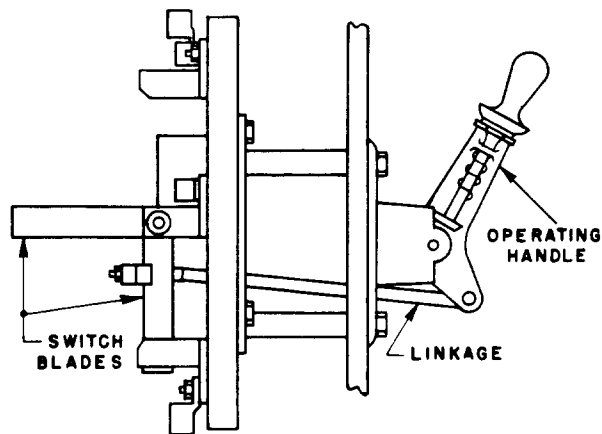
KS-15515 Switch Showing Operating Handle and Linkage to Switch Blades
